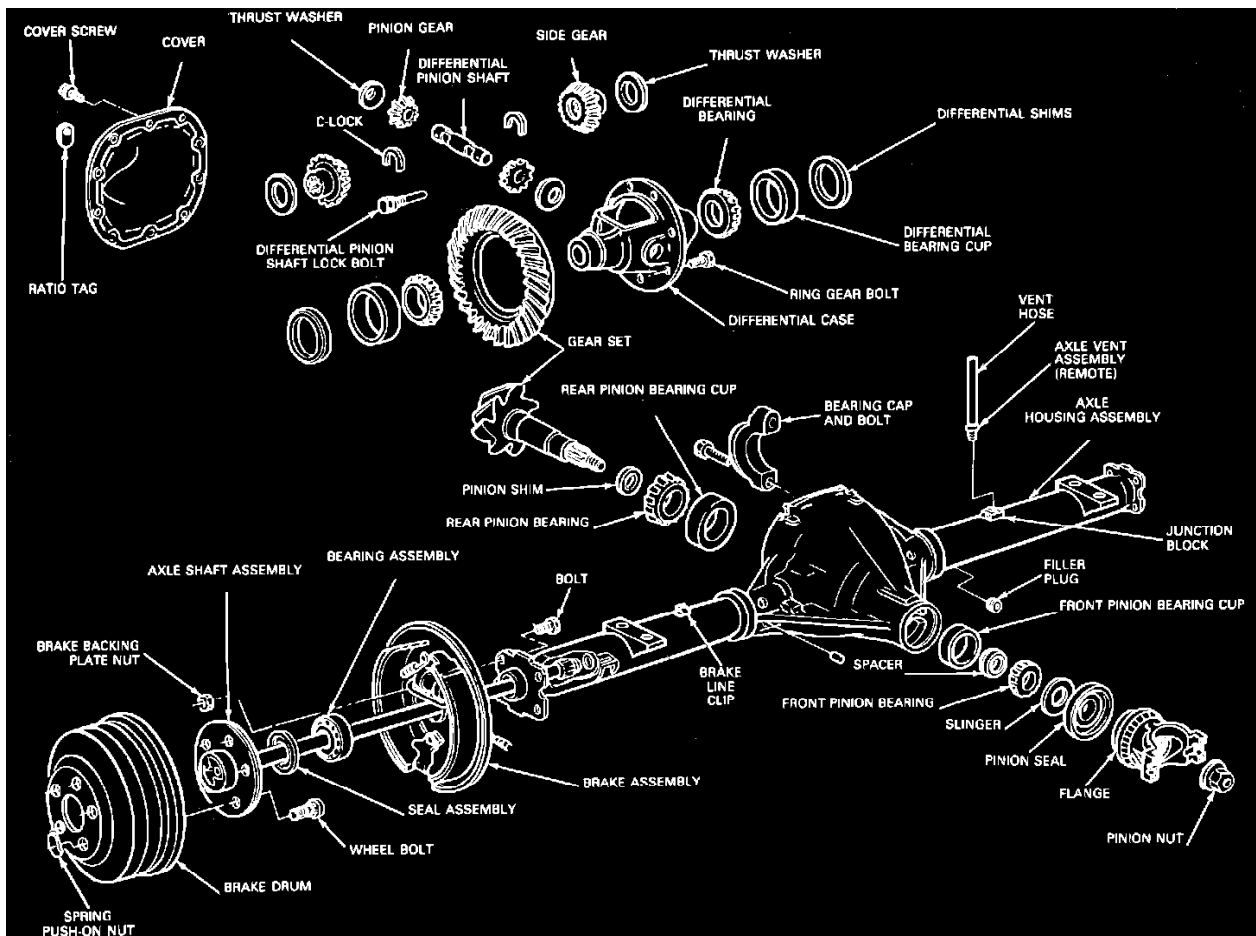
Disassembled view of Ford 7 1/2 inch ring gear axle
